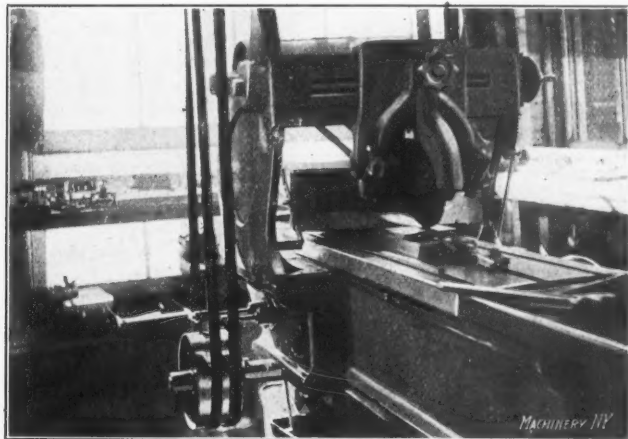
Surface Grinder with Wheel Guard and Dust Funnel
